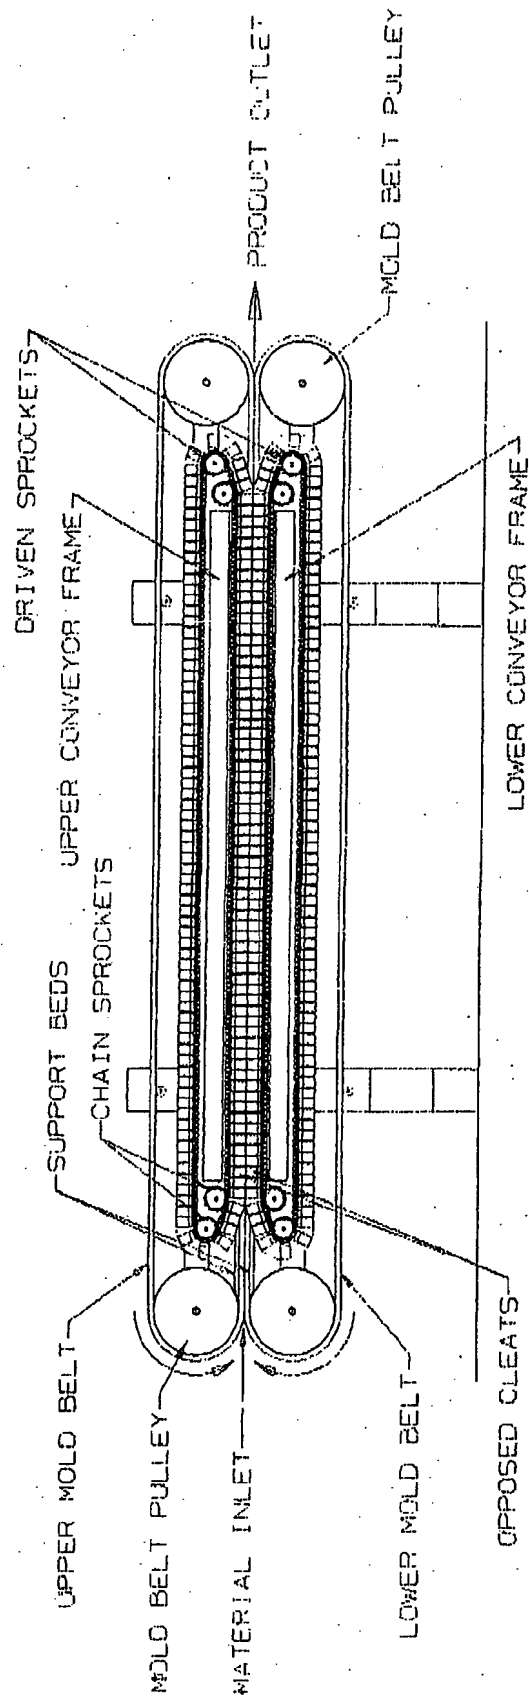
SIDE VIEW OF FORMING APPARATUS USING TWO MOLD BELTS;
